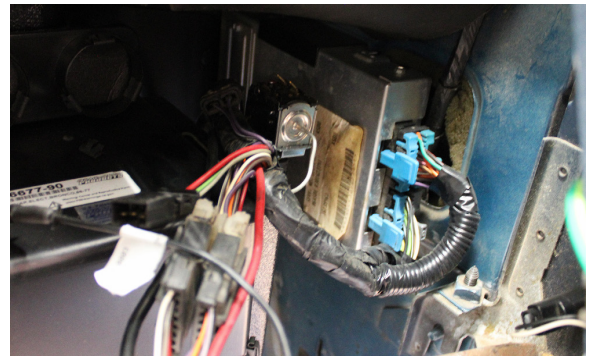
Install ECM into bracket & Connect Factory Wire Harness.
